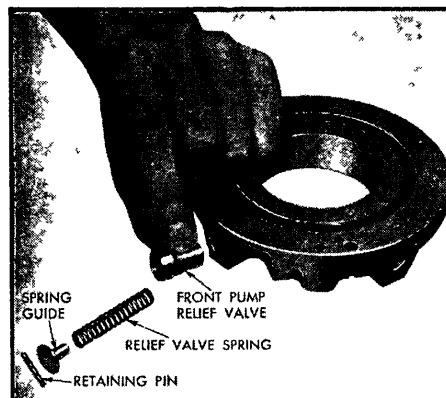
Removing front pump relief valve, spring and guide. 1952
